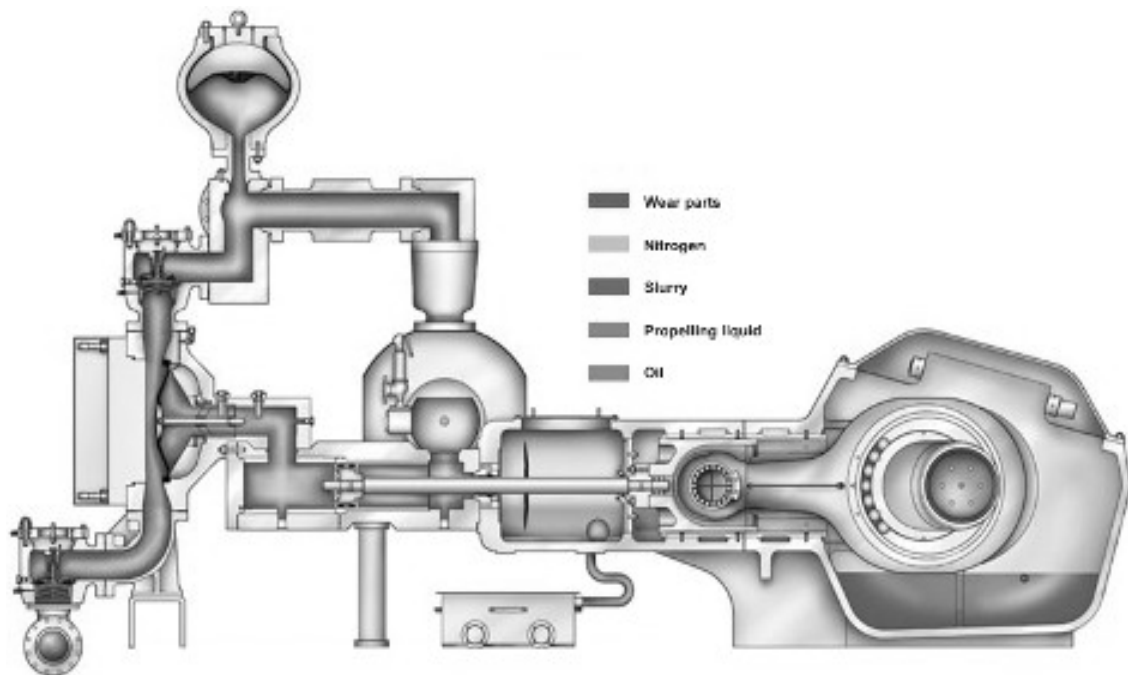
A Crankshaft Driven Diaphragm Pump.¹³
